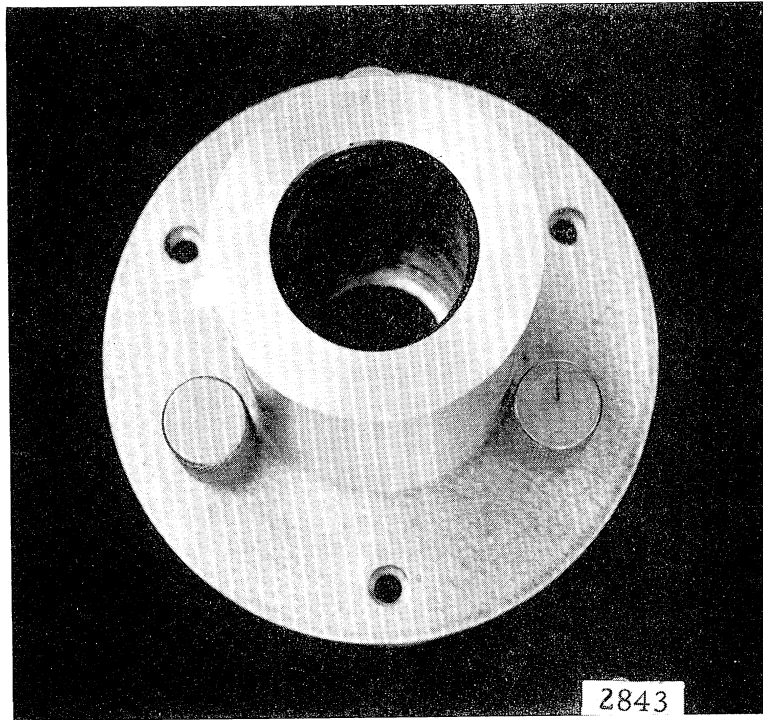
Horn Stabilizer Unit on Adjustable Plate
